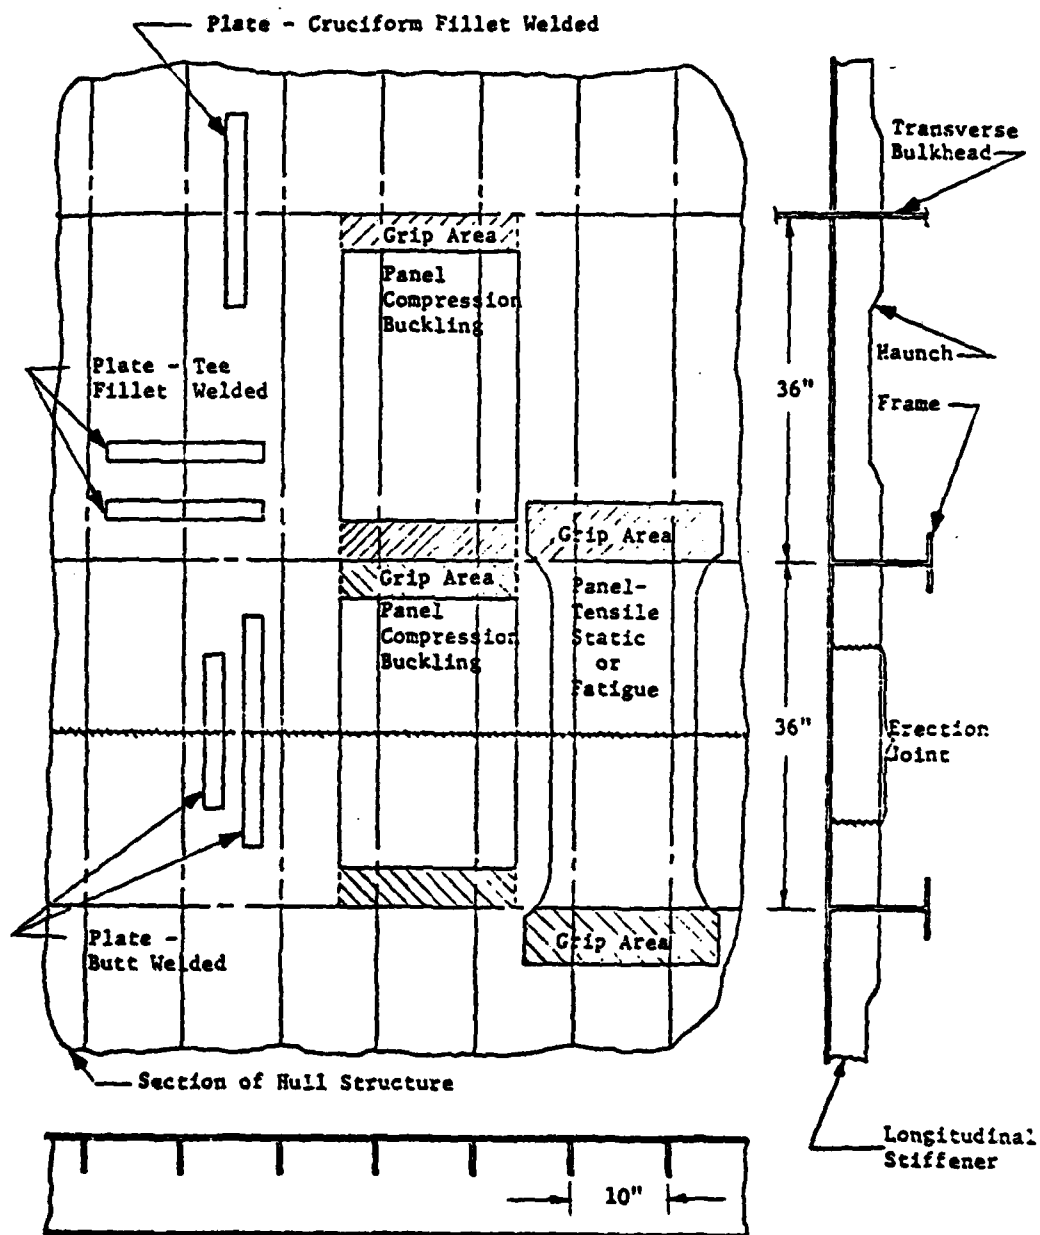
3KSES Structure Segment Showing Orientation of Typical Plate and Panel Test Specimens.
